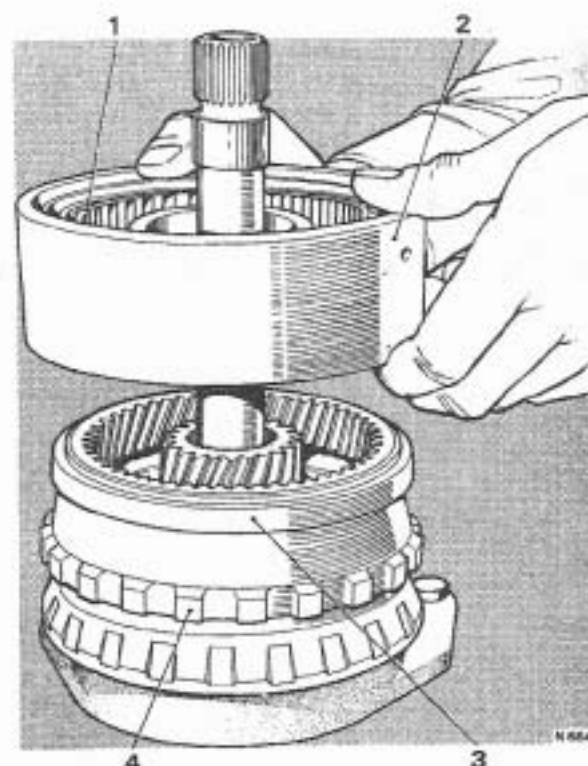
REMOVING THE REACTION CARRIER AND REAR SPRAG ASSEMBLY
